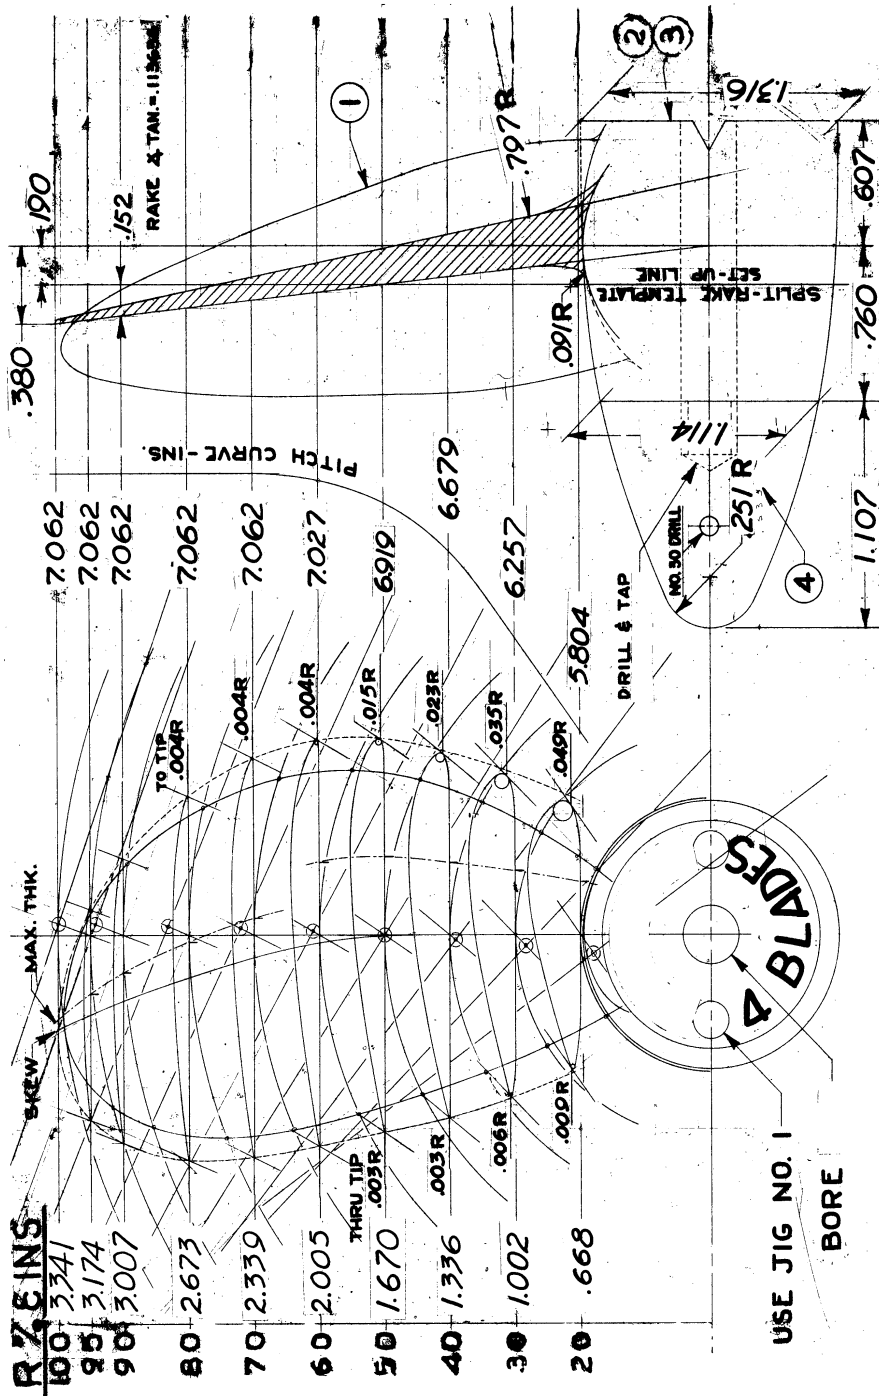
Propeller drawing, U of M Propeller No. 5.
